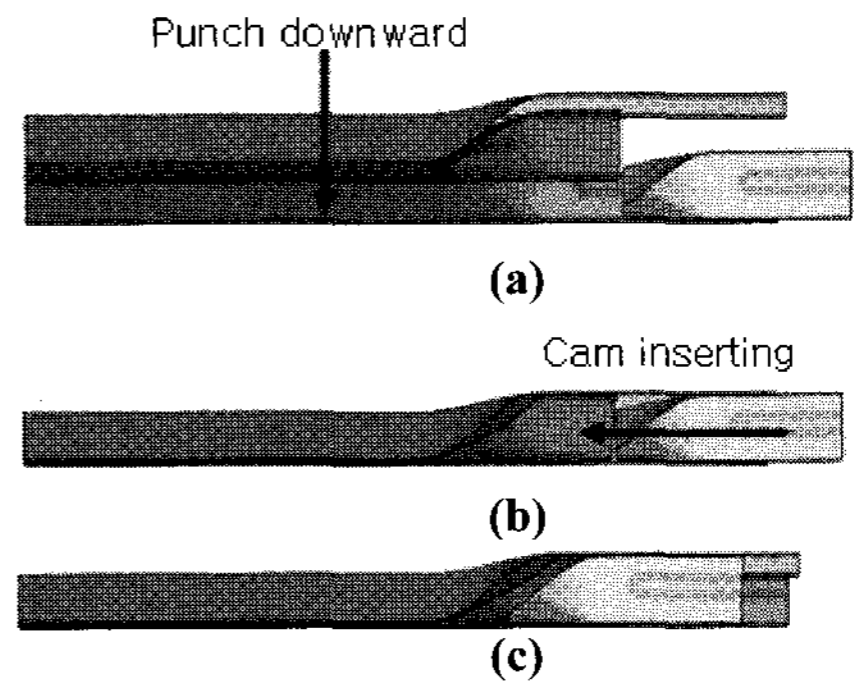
Relative movement of the tools and the tube with the initial design during the OP20 process: (a) punch forming process; (b) punch forming and cam inserting process; (c) final shape
